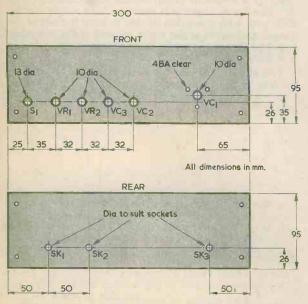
Dimensions and drilling details for the front and rear panels. The material is aluminium sheet
